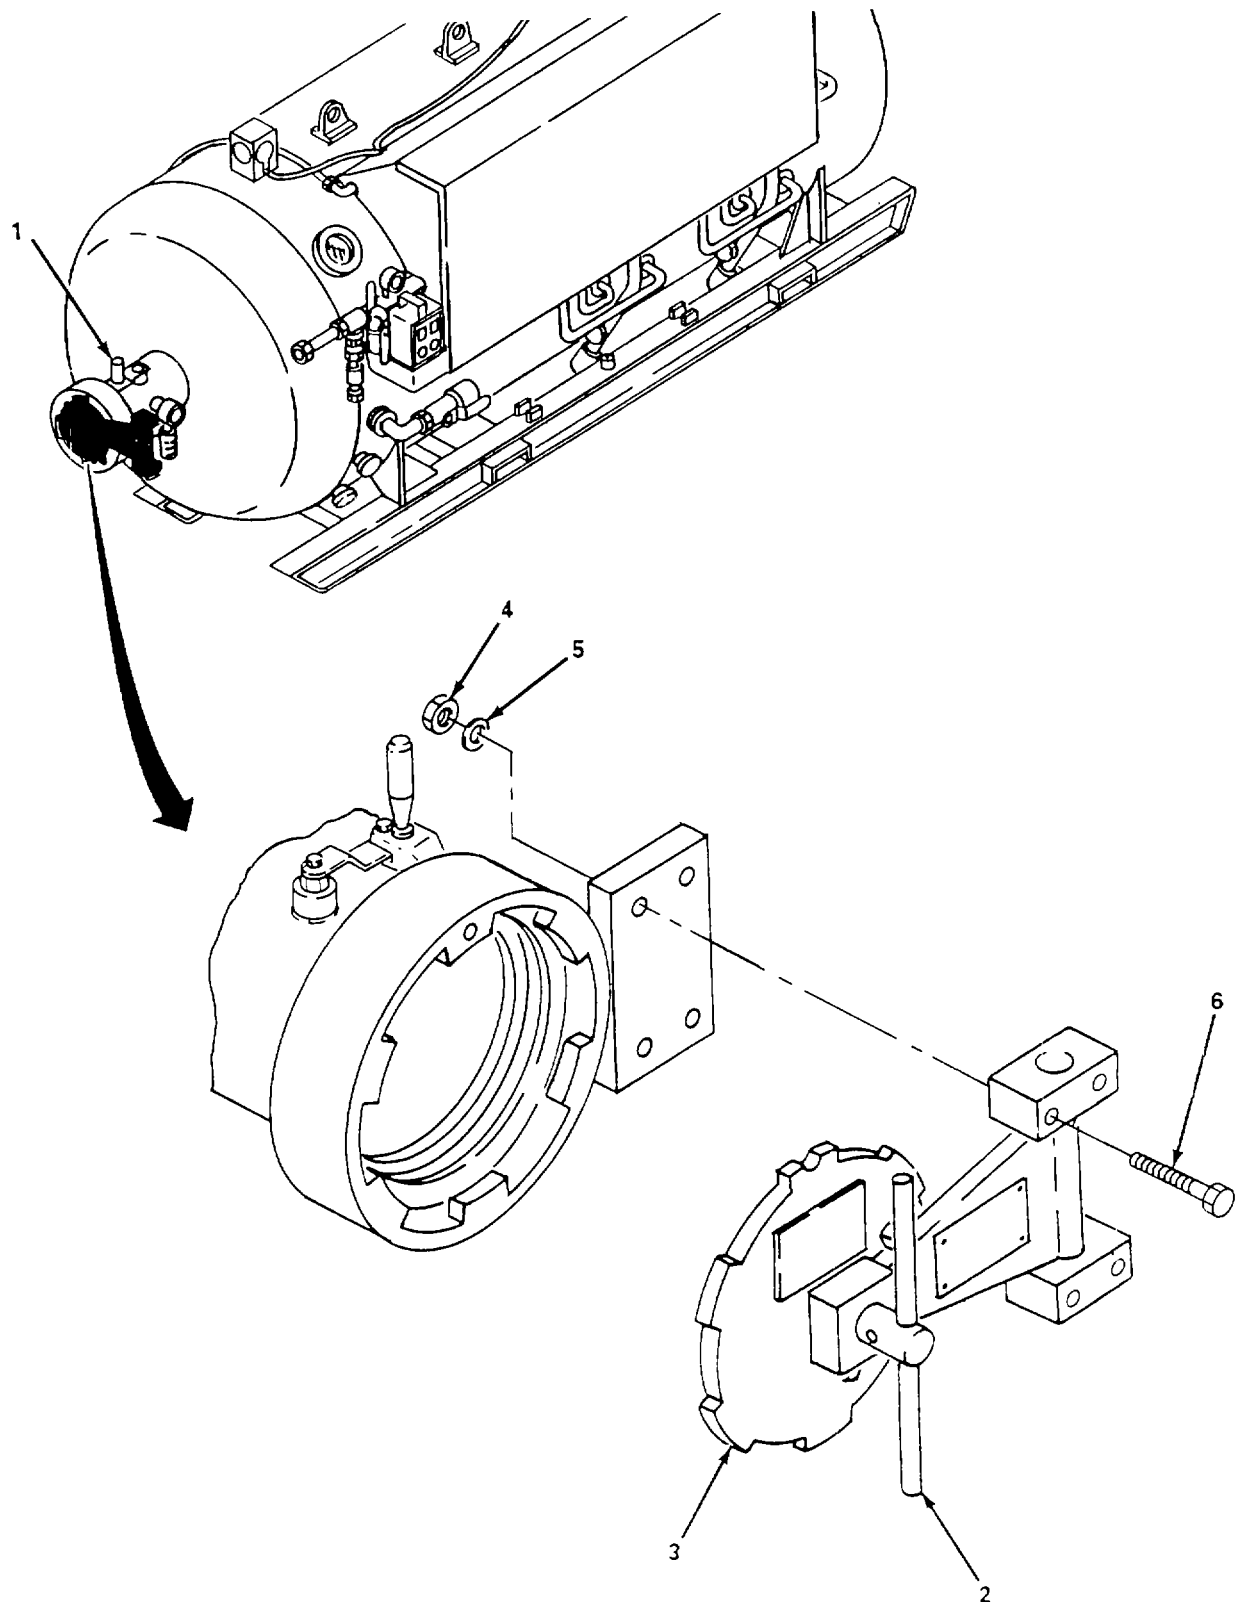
Medical Lock (M/L) Outer Door Assembly, Replace.
